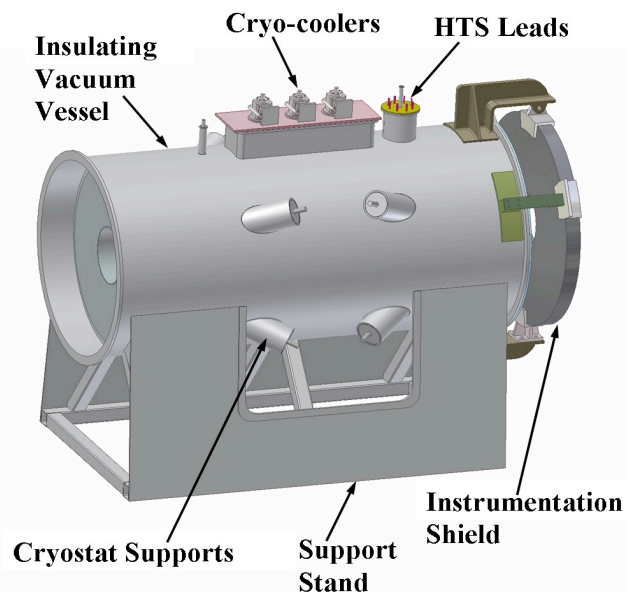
CAD image showing the exterior of the complete tracker solenoid.
